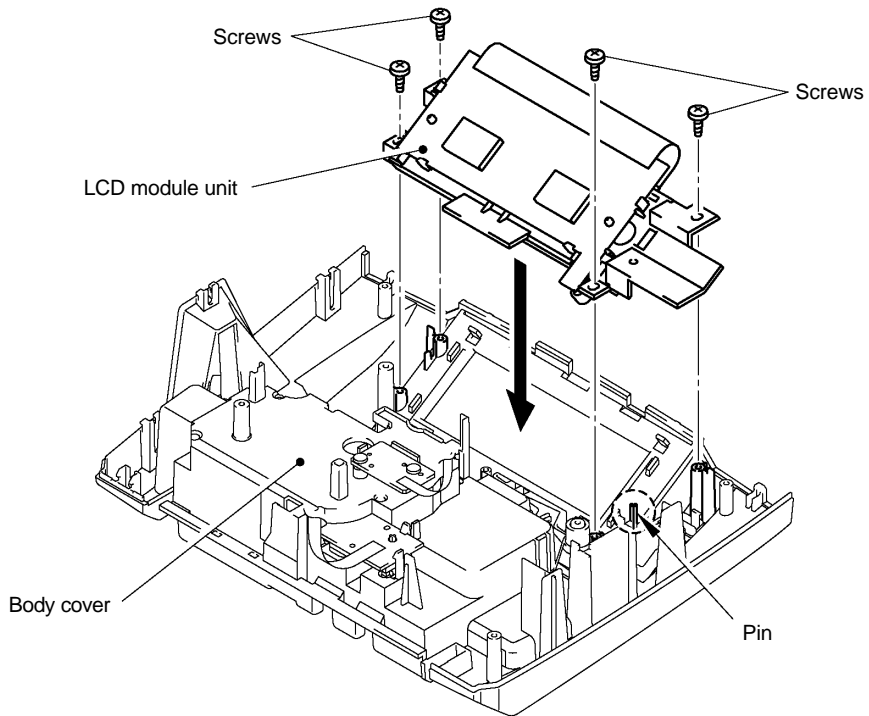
Reassembling the LCD Module Unit (4)
